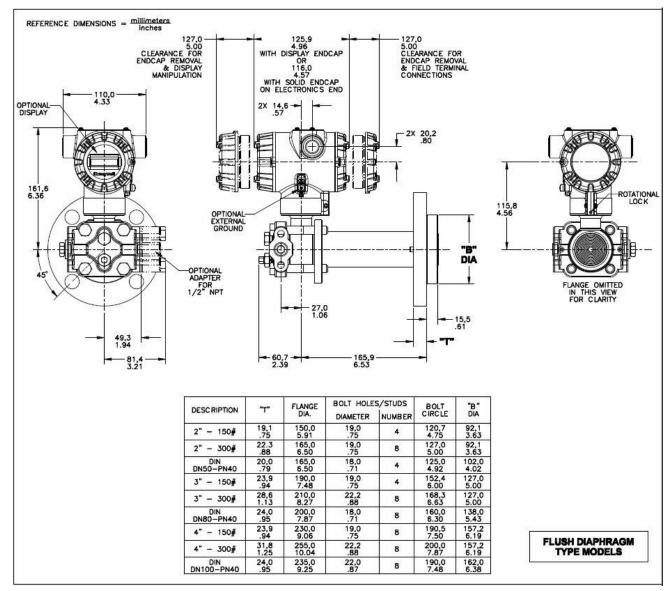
Typical mounting dimensions for flush diaphragm type models STF724 and STF732.
